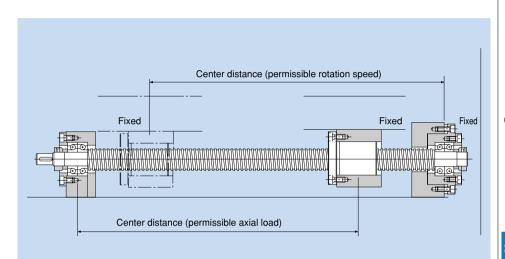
Screw Shaft Mounting Method: Fixed - Fixed
